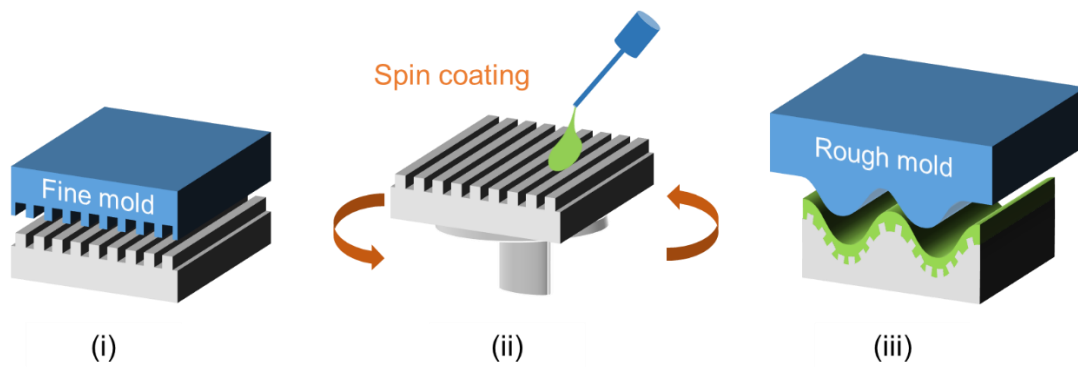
Diagram of the proposed multi-step imprinting process; (i) Imprinting is carried out using a fine mold; (ii) A protective layer is applied by spin coating; and (iii) Imprinting is carried out with a rougher mold.
